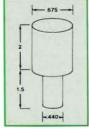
Steel tool used to press the steering shaft from the worm gear.
